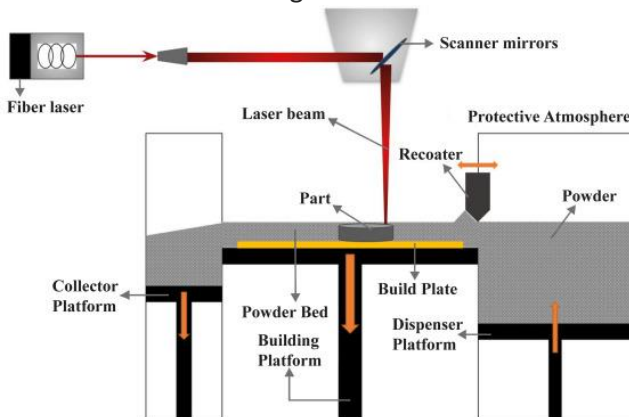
Laser Powder Bed Fusion technology Process and Equipment [3]
